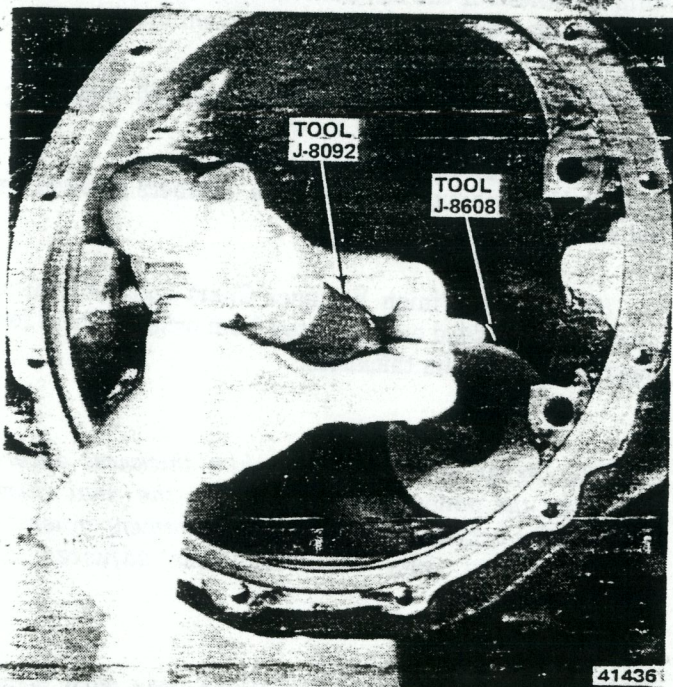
F-37 Pinion-Rear Bearing Cup Installation
